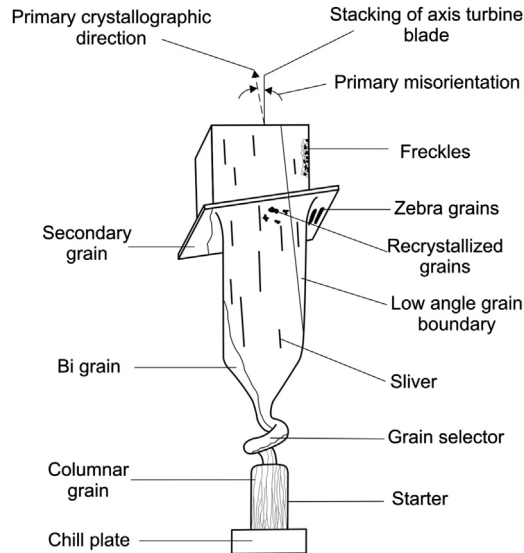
SC and DS casting defects scheme.
